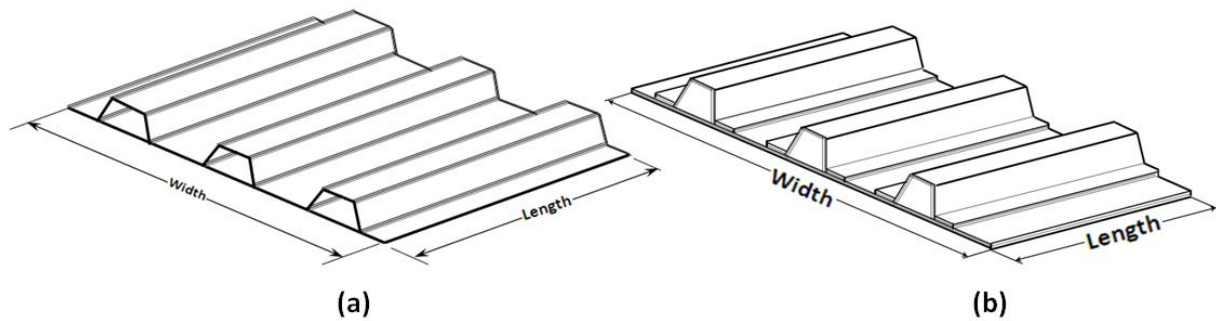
Schematics of a typical: (a) Metallic Hat Stiffened Plate (b) Composite Hat Stiffened Plate
